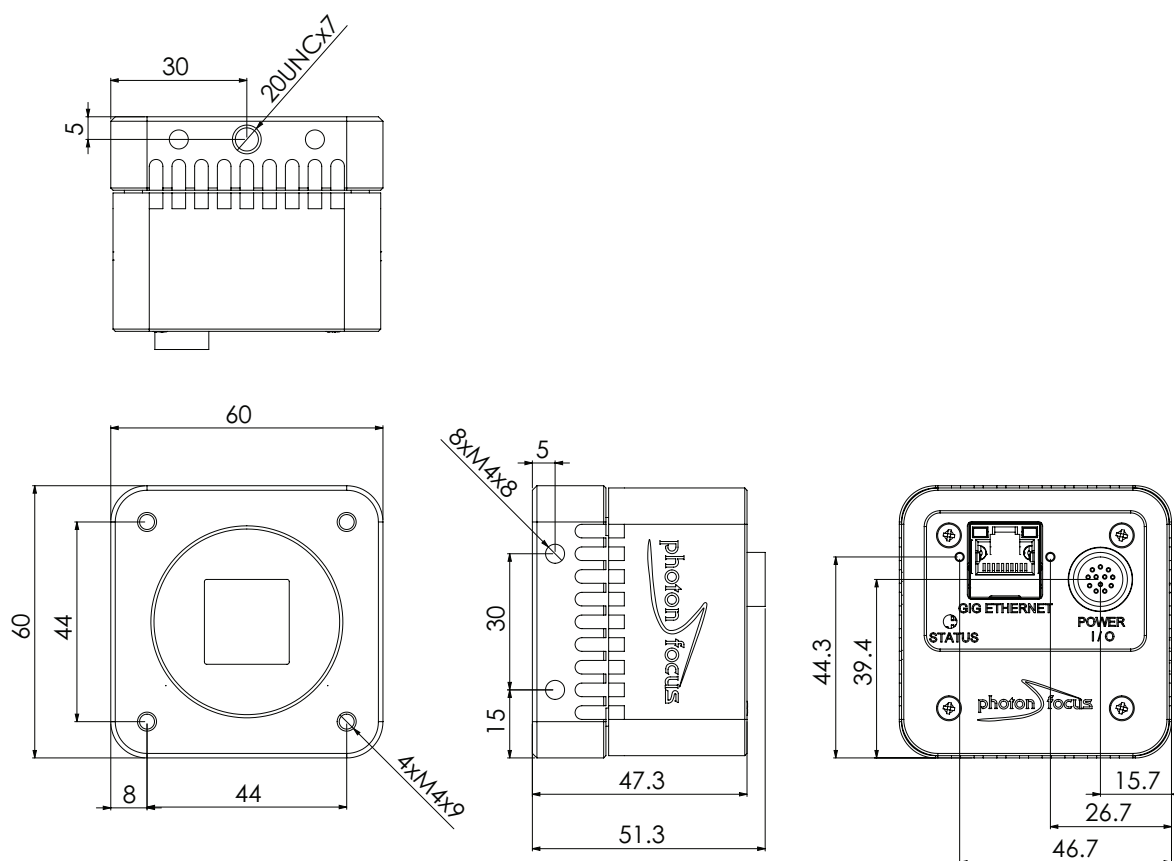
Mechanical dimensions of the MV1-D2080-G2 GigE camera with M42x1 mounting (no adapter)
